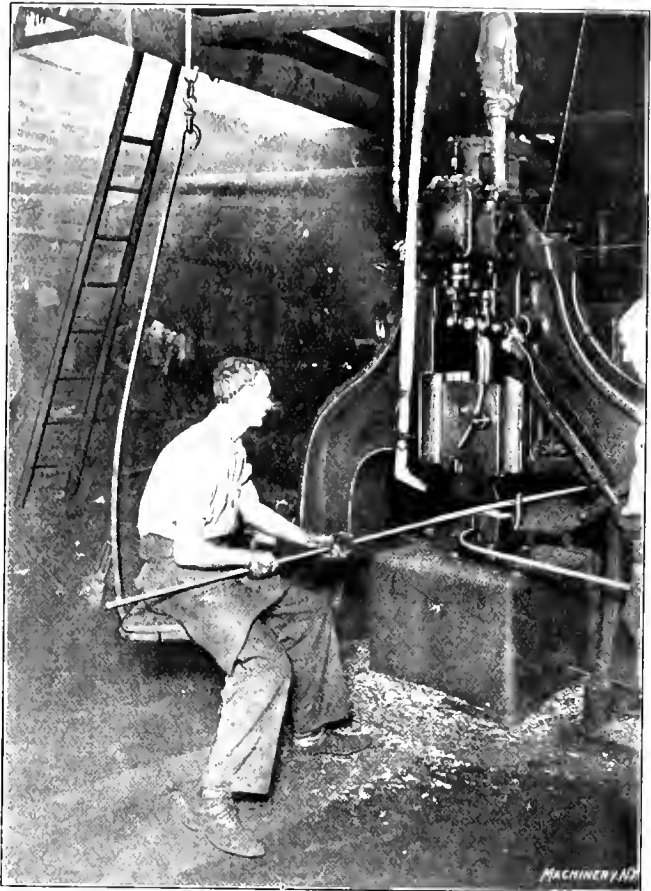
Hammering a Round Bar to size under a Small Cement Hammer
